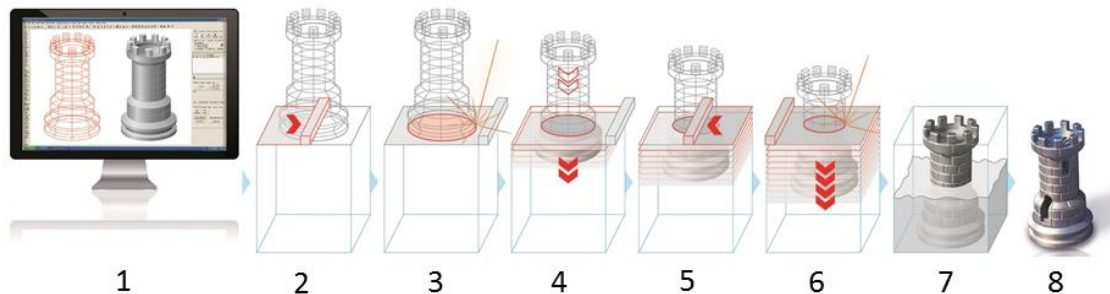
Scheme of the process steps for the manufacturing of laser sintered parts (source: EOS GmbH)
